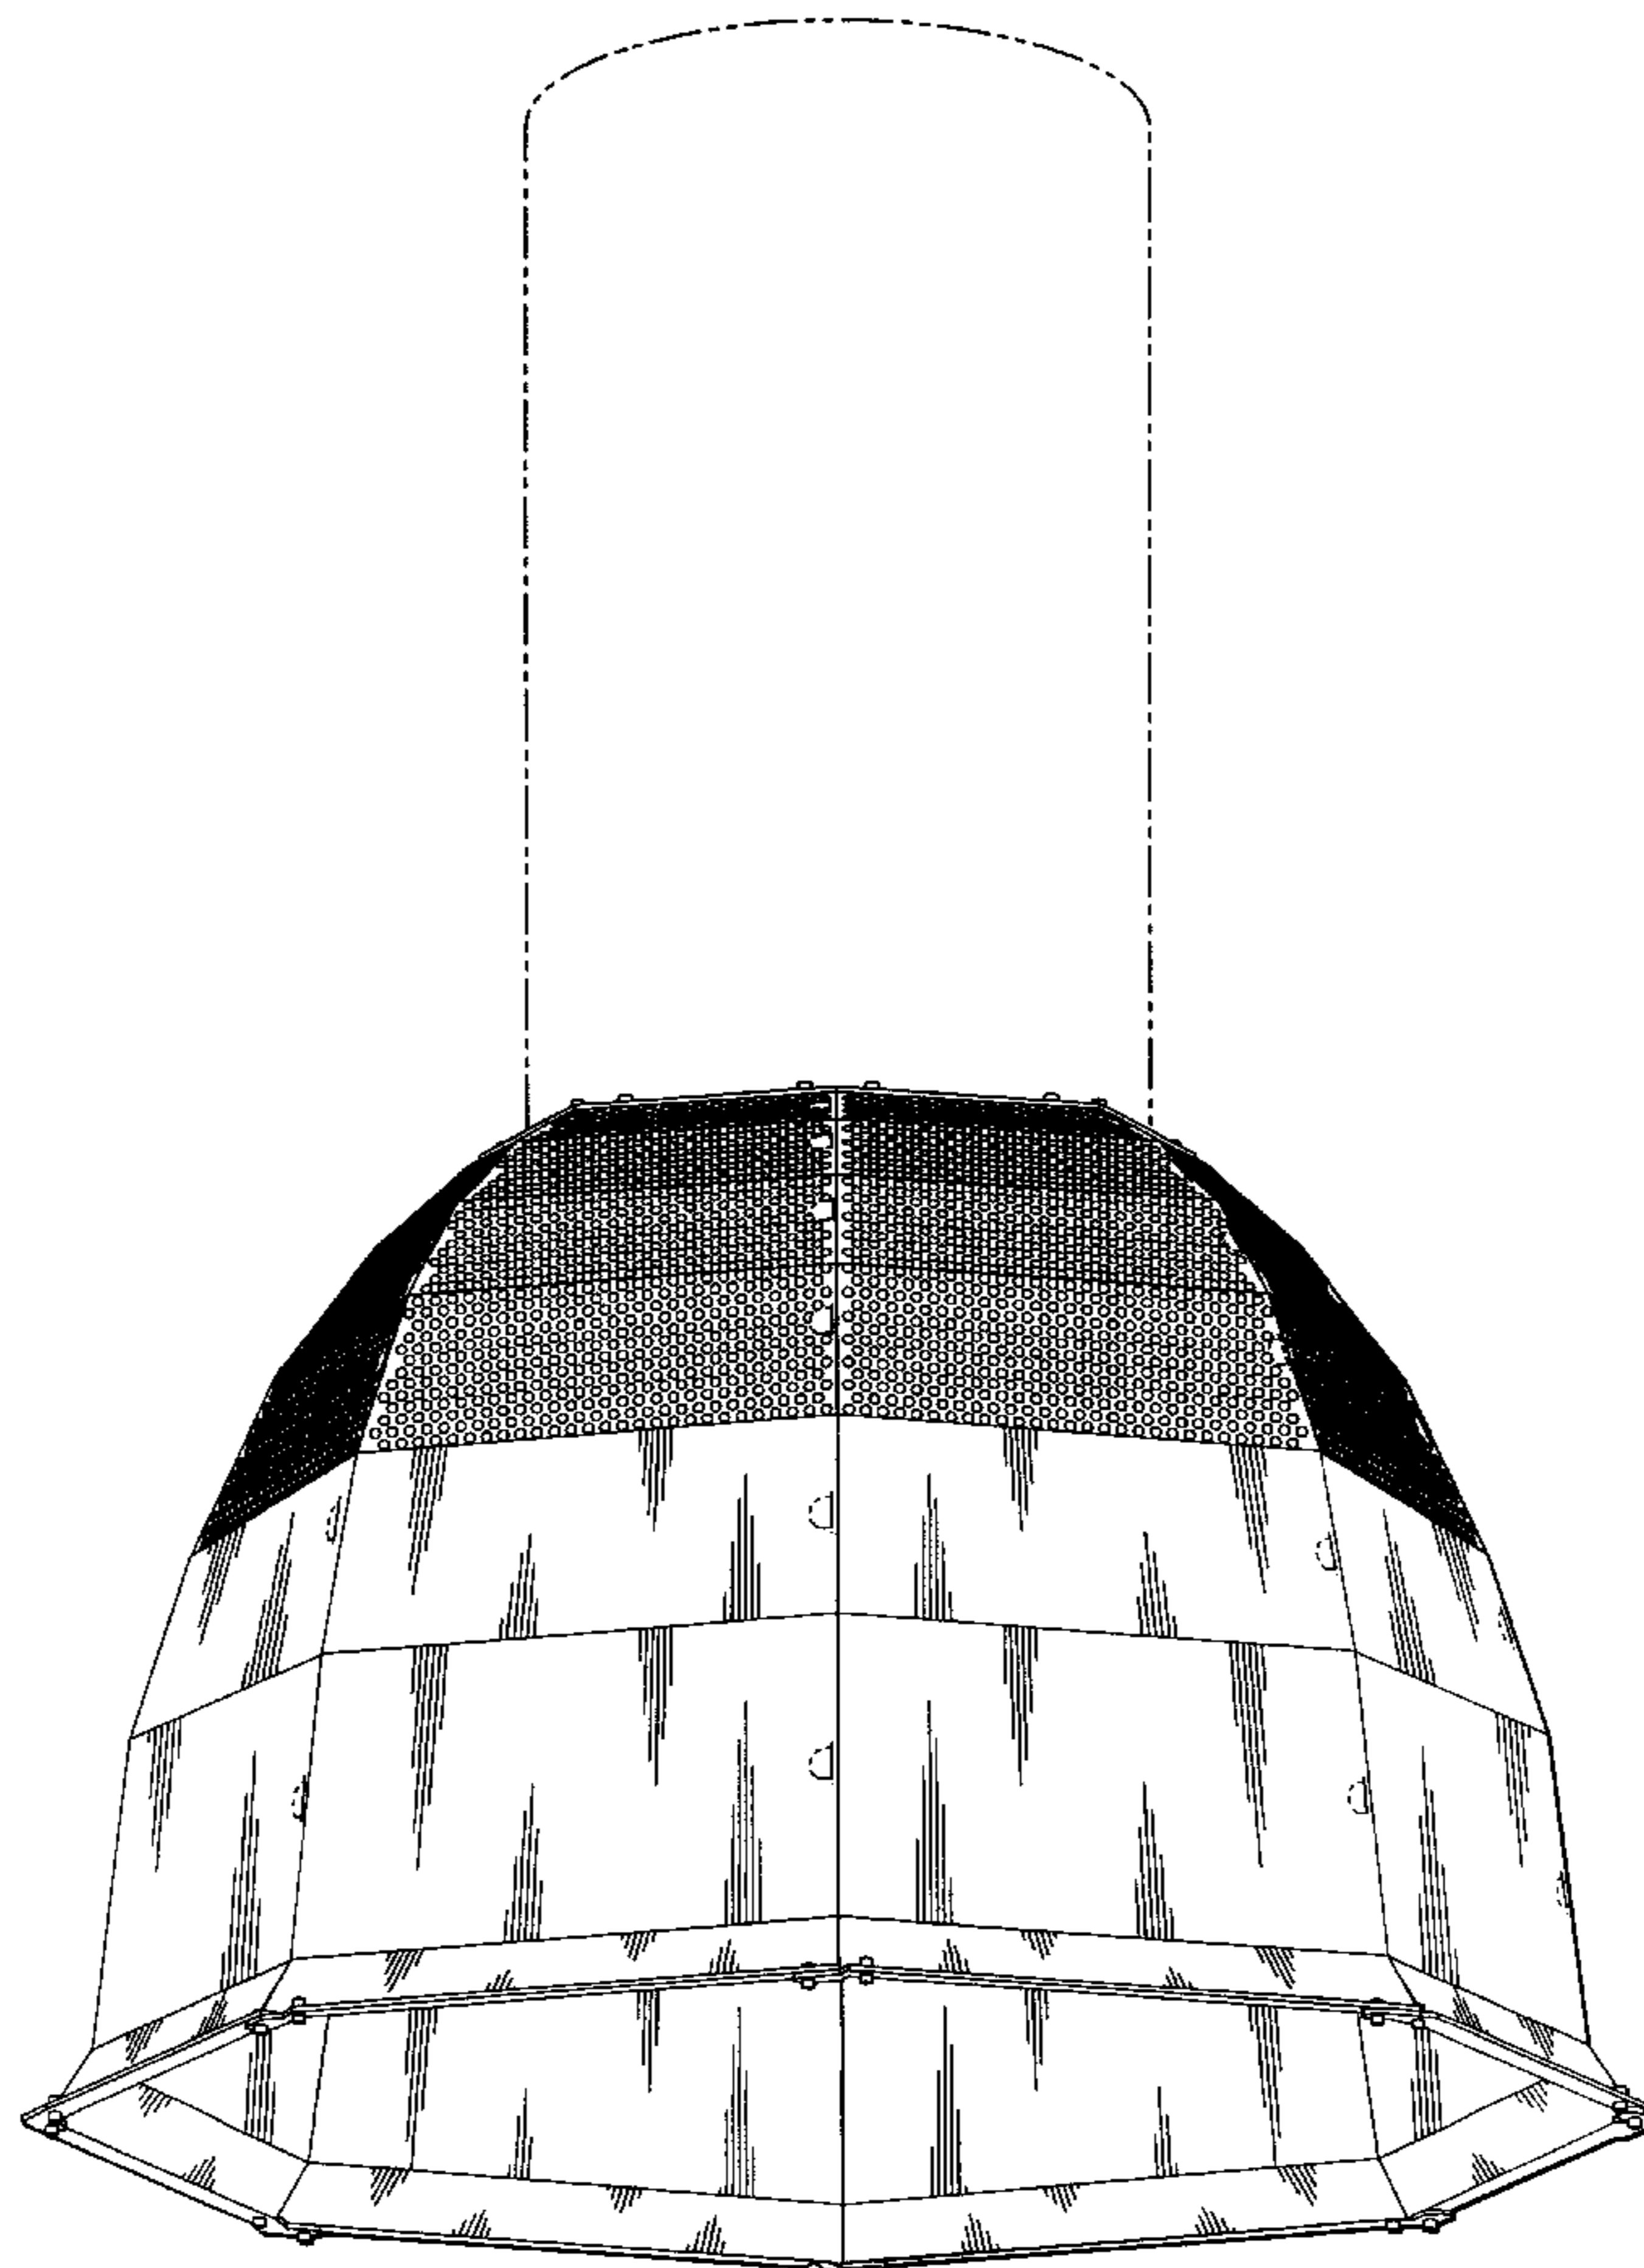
is a front elevational view of the reflector assembly of FIG. 5;
